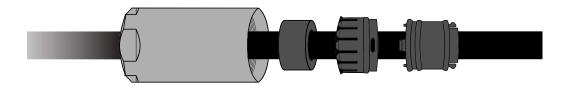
Cable with back shell, rubber seal, spacer, and cord grip
